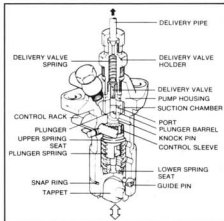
SINGLE INJECTION PUMP ASSEMBLY
